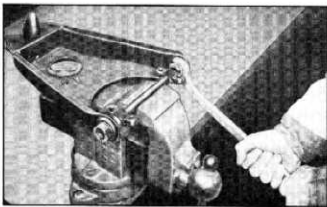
Loosening Lower Control Arm Shaft Bushing Lock Nut
